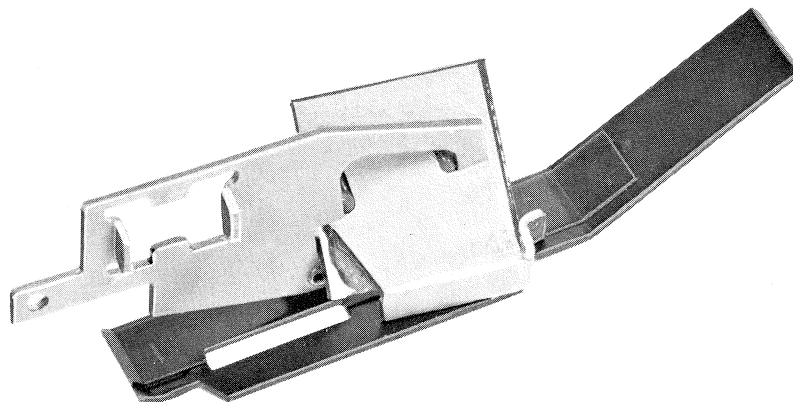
GATE SLIDE ASSEMBLY-197825
